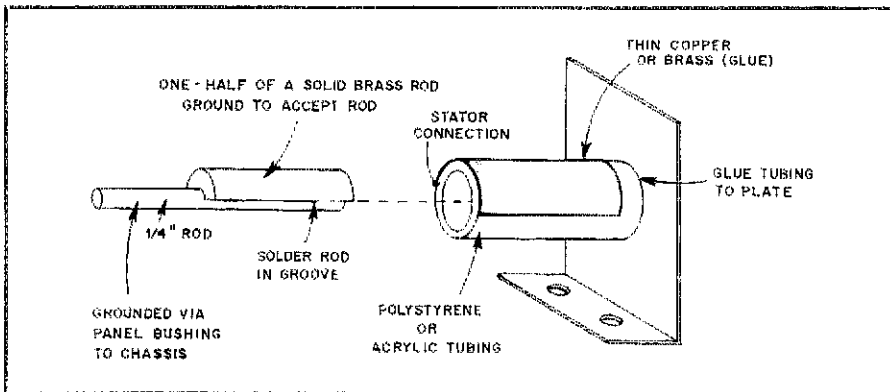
A cylindrical format provides still another tuning device that can be made at home. The rotor unit is semicircular brass or copper to which a 1/4-inch-diameter tuning rod has been soldered. The stator section is a piece of plastic tubing to which thin copper or brass sheeting has been glued (see text).
